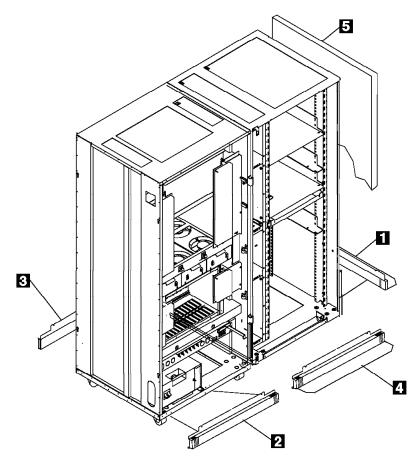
3746-900 and Controller Expansion Ground Brackets (Front View)
